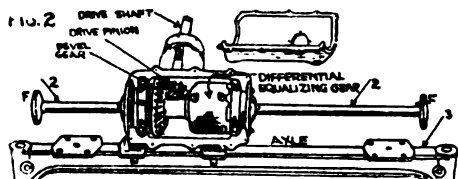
Illustrates the method of placing the differential housing on the "dead" front and rear axle with drive shafts (2), which drive the universal joint (B, fig. 3) by flange connection (F).
